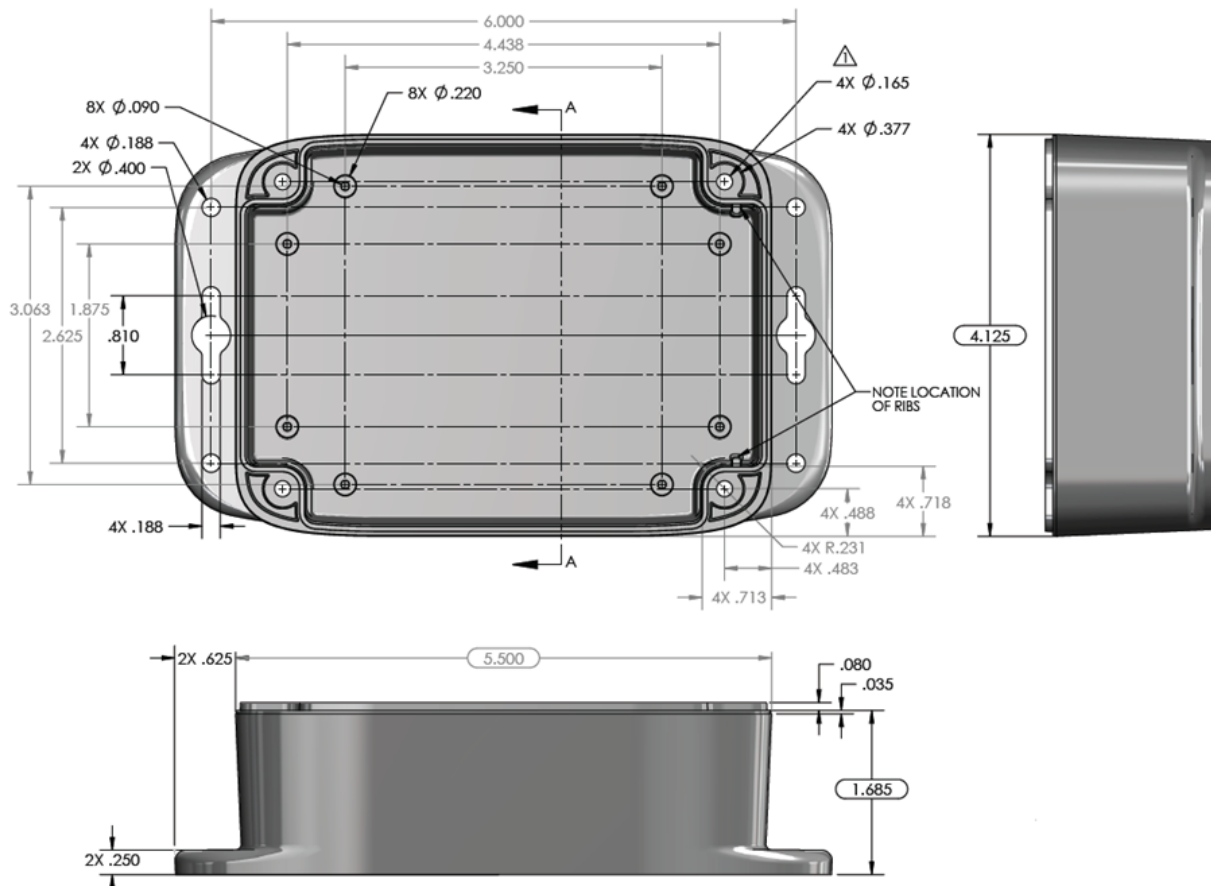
Wireless transceiver dimensions (Type Lite). All dimensions are in inch.
